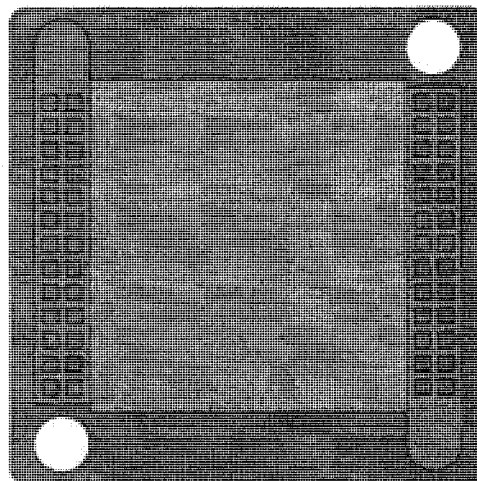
(c) Assembly view of bipolar plate, gas channel and membrane
